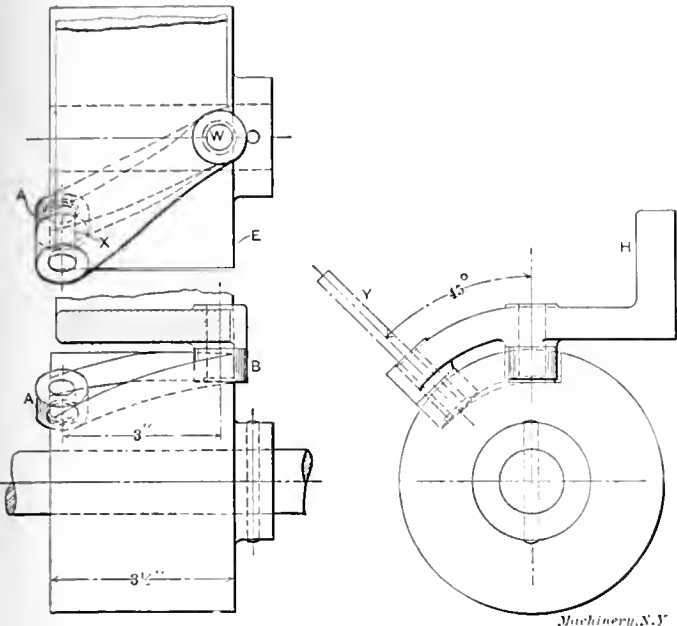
Cam with Two Rollers which reduce its Longitudinal Movement
